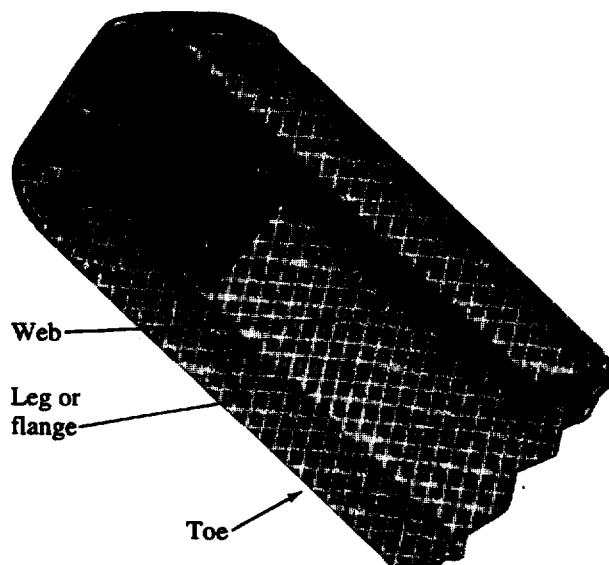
Section of Ladder Rail — Fiberglass Ladder
